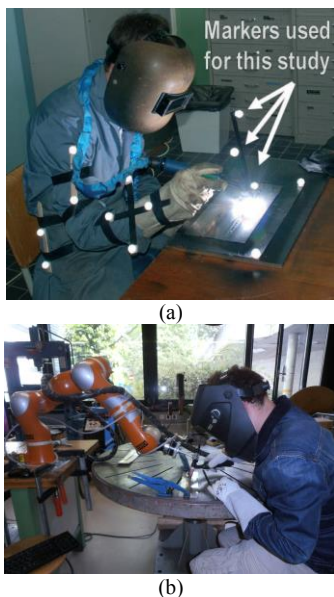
(a) Setup used for data collection in the study [5, 6] while professional and novice welders did conventional manual welding without a robot. The indicated three markers provide the tip point position of the welding torch. (b) Interactive manual welding with robotic assistance applied in [1]. The robot joint-angle readings provide the position of the tip point of the welding torch.
